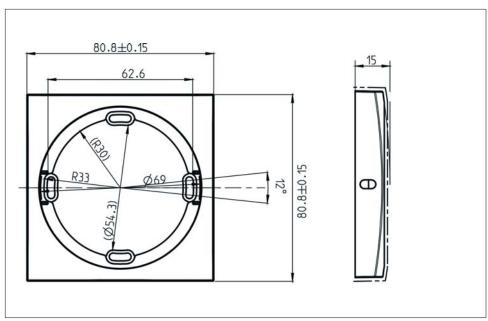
Dimension sheet for WRU 200 reader frame (top view and side view)
